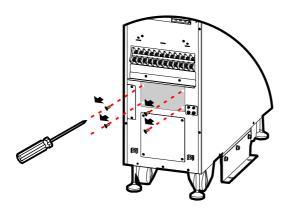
Unscrew the bolt on the mode connector cover plate
